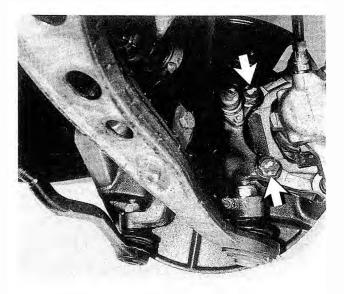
Front brake caliper mounting bolts (arrows). Right (passenger) side shown.
